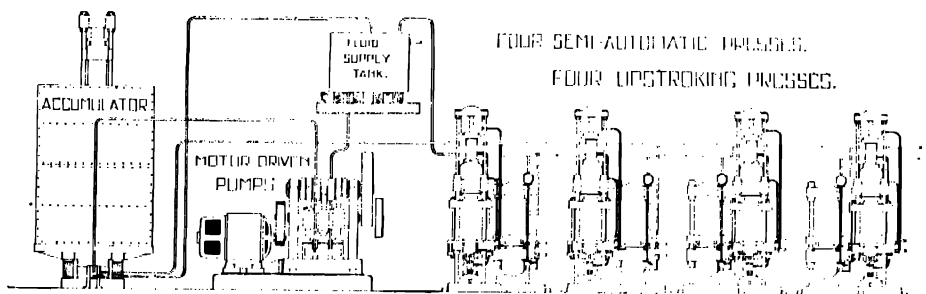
Lay-out of hydraulic moulding plant. (Bradley & Turtton, Ltd.)
